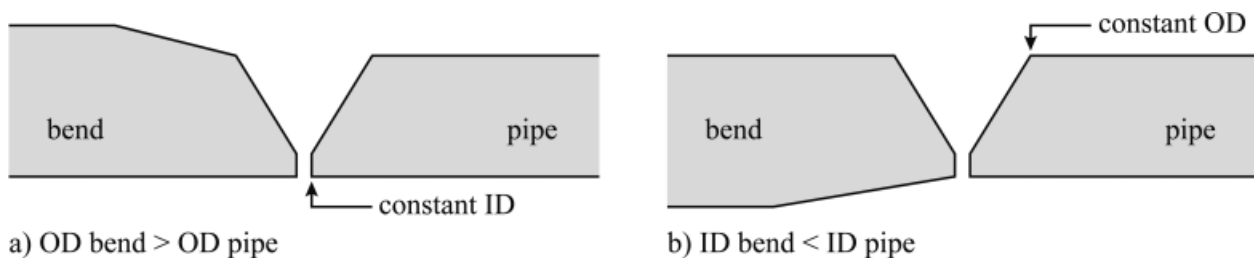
Typical bevel preparations for girth welding of pipe-to-bend connections
